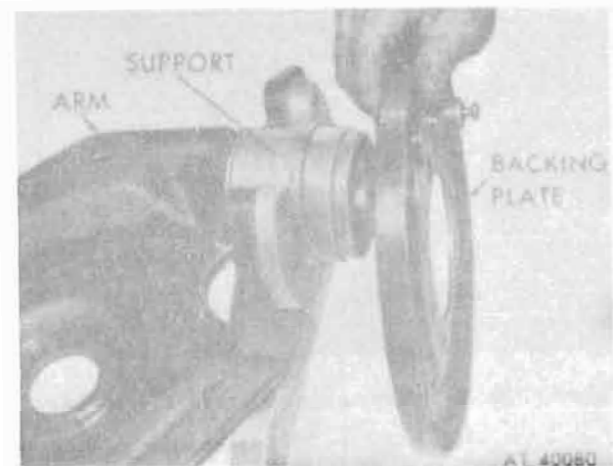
Brake backing plate and support (M151A2, M825, and M718A1 vehicles).
